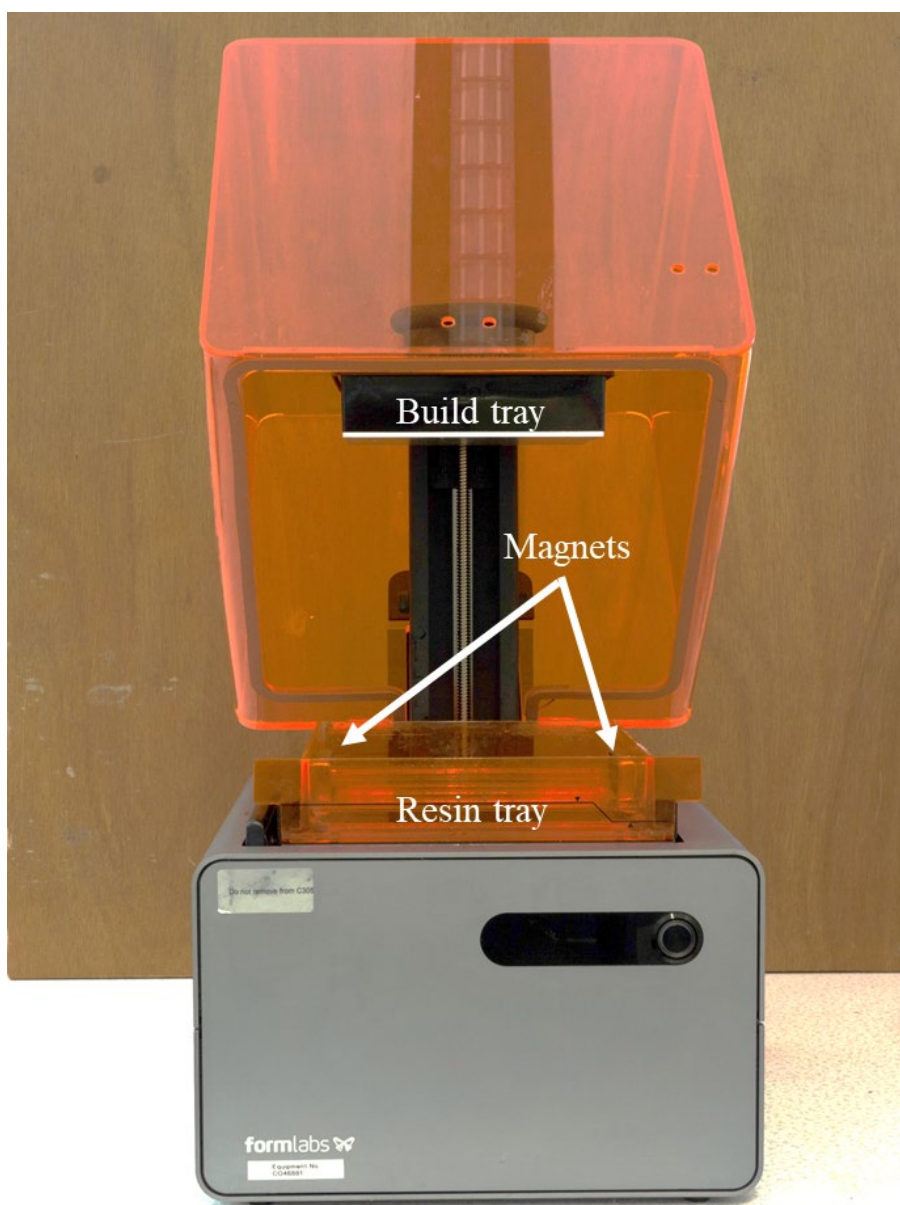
Formlabs 1+ 3D Printer with magnets inside the resin tray.
